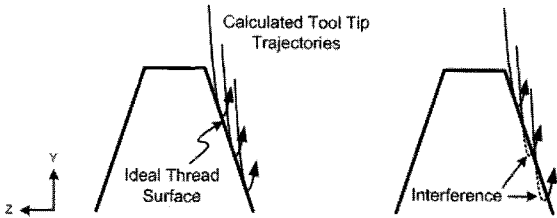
(a) Thread cutting without interference, (b) Thread cutting with interference
